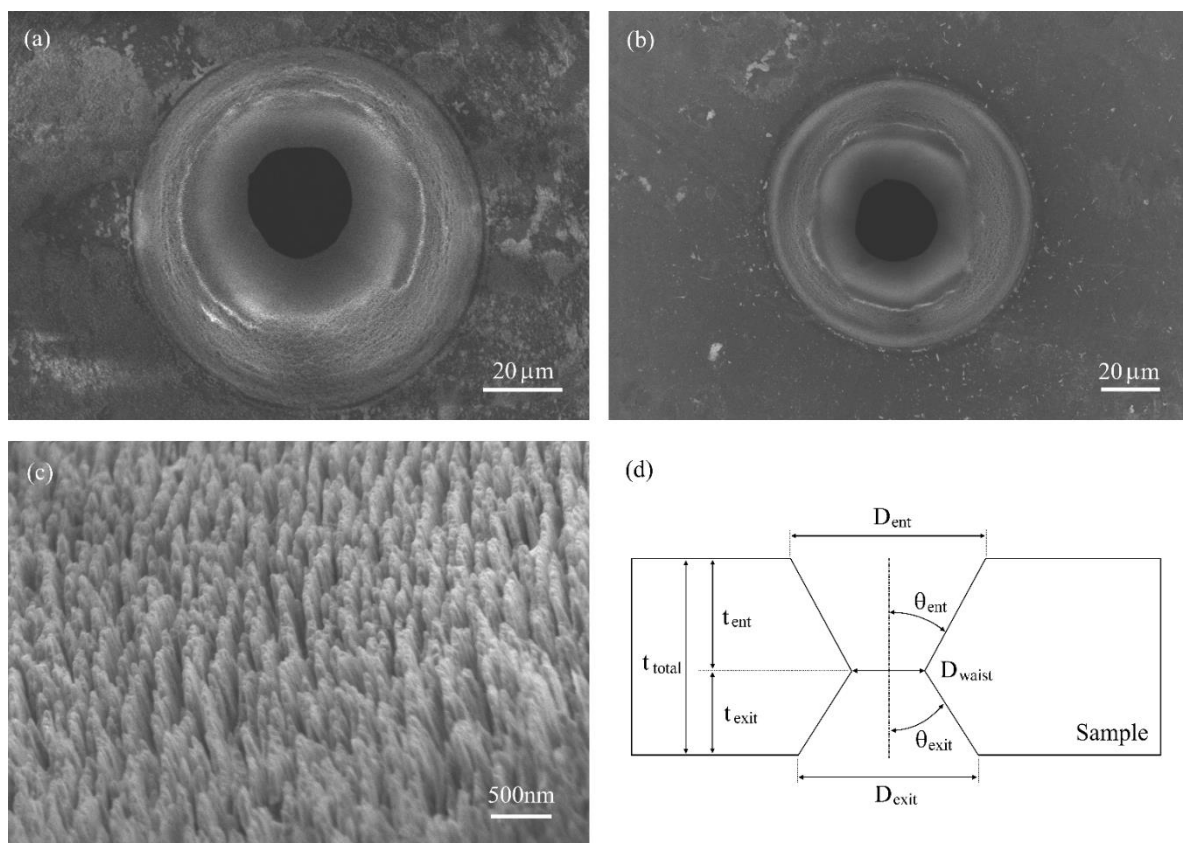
SEM view of the drilled hole in a diamond using fs laser: (a) Front view, (b) rear view, and (c) Entrance side of the hole. (d) The geometry of the hourglass-shaped hole.
